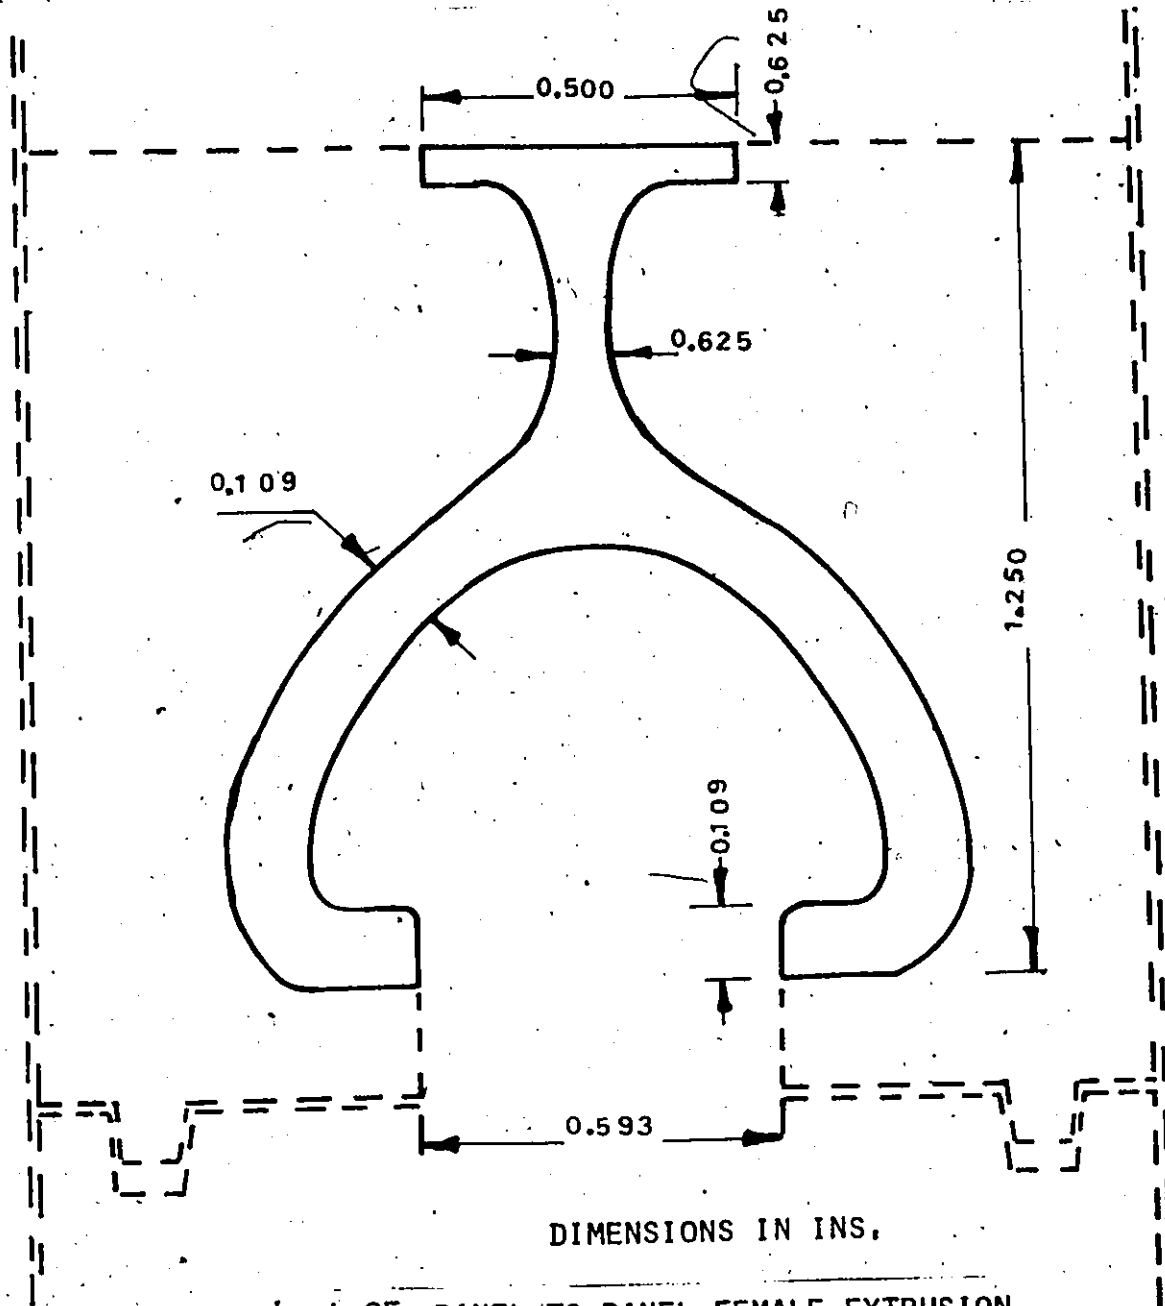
PANEL-TO-PANEL FEMALE EXTRUSION
